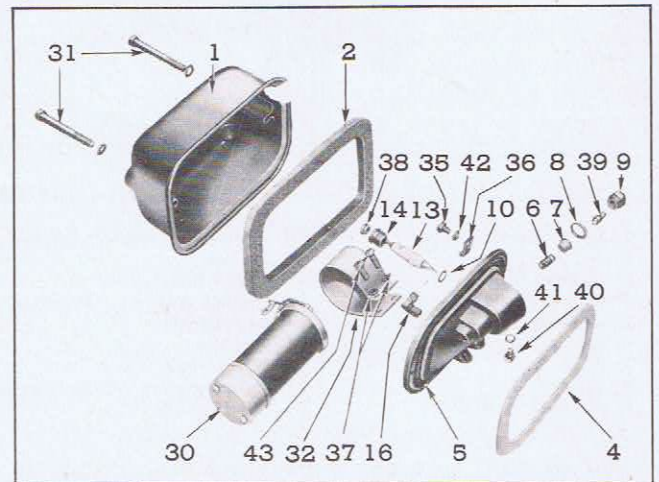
AIR HEATER DETAILS AND RELATIVE LOCATION OF PARTS.
